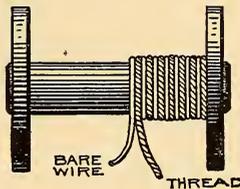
MANNER OF WINDING VARLEY COIL.
